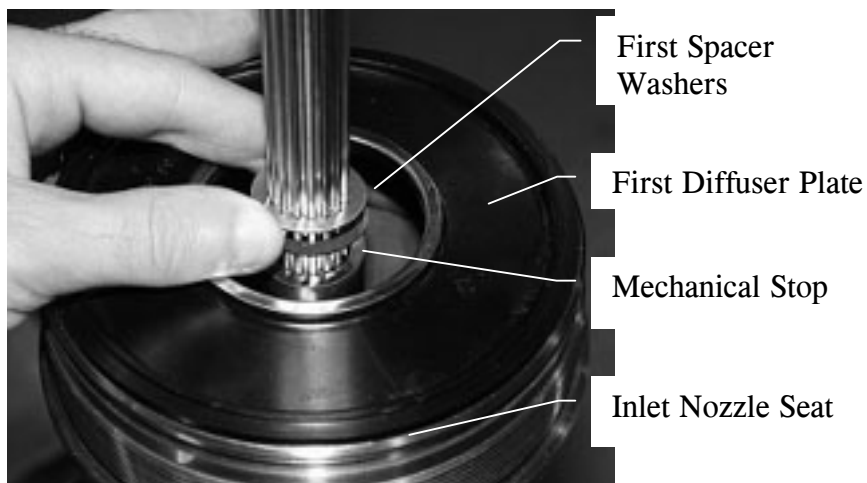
Adjust the Gap Between the Impeller and Diffuser Plate Using Spacers
